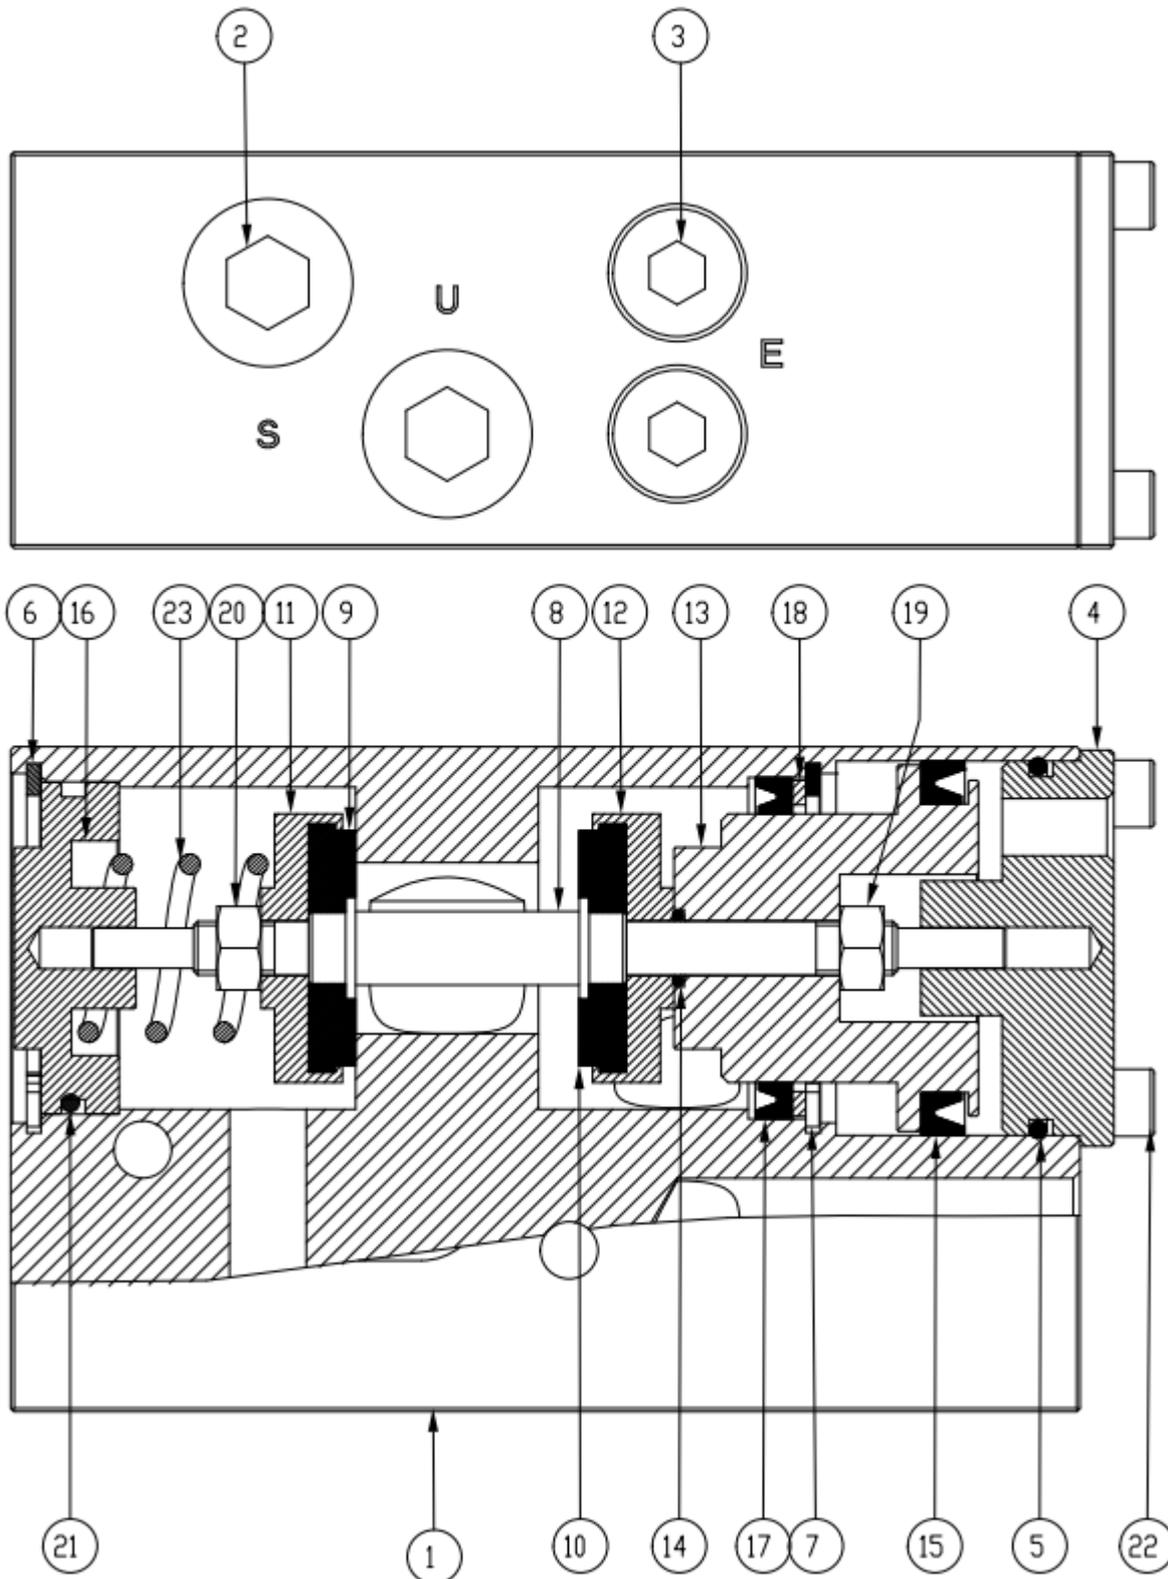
CO 3 way pneumatic valve size 1": aluminum machining or stainless steel machining
